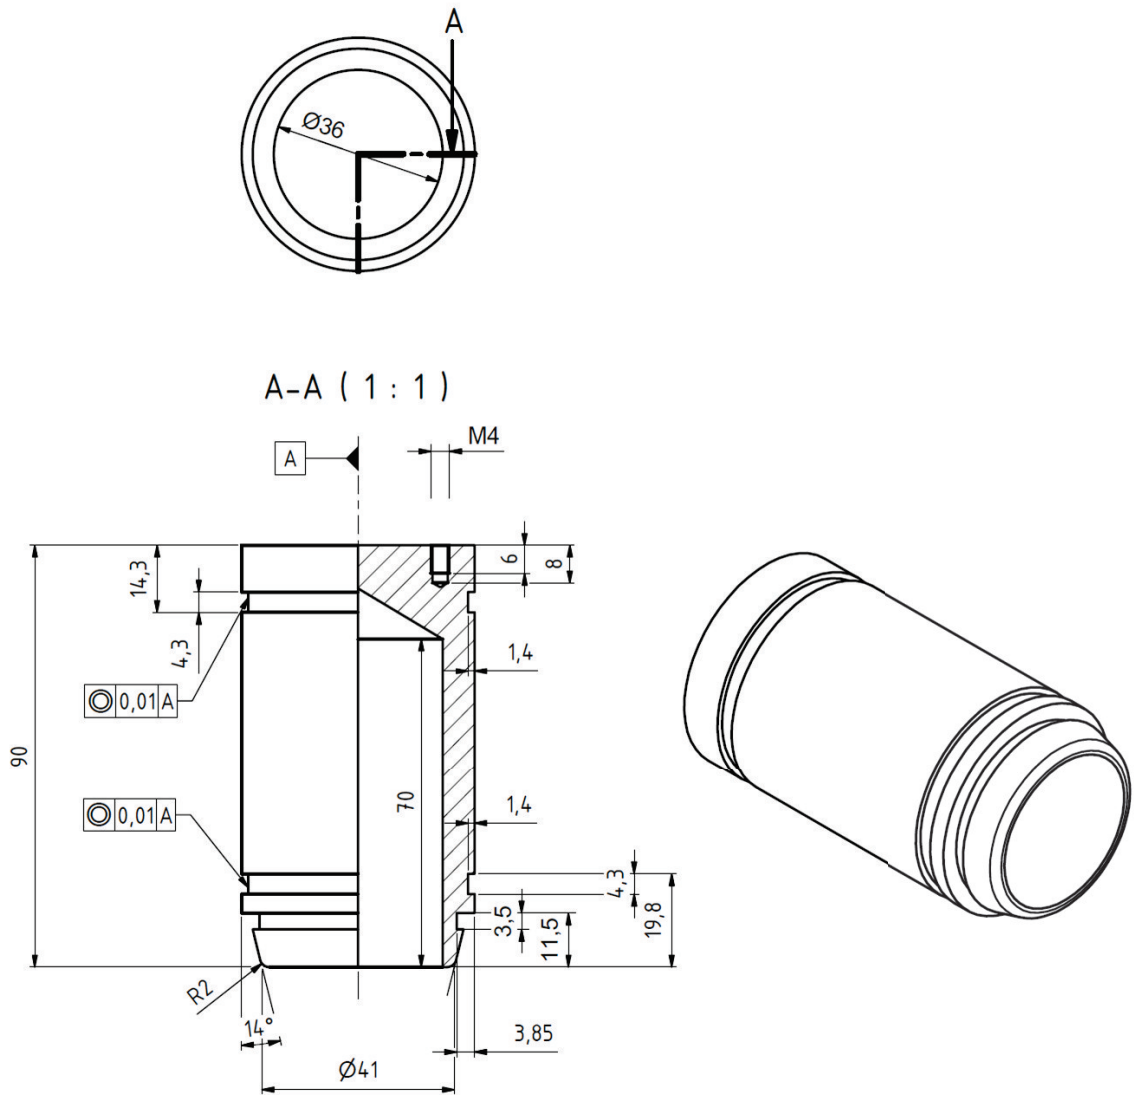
Construction drawing of piston with 49.7 mm diameter and 90 mm height.
